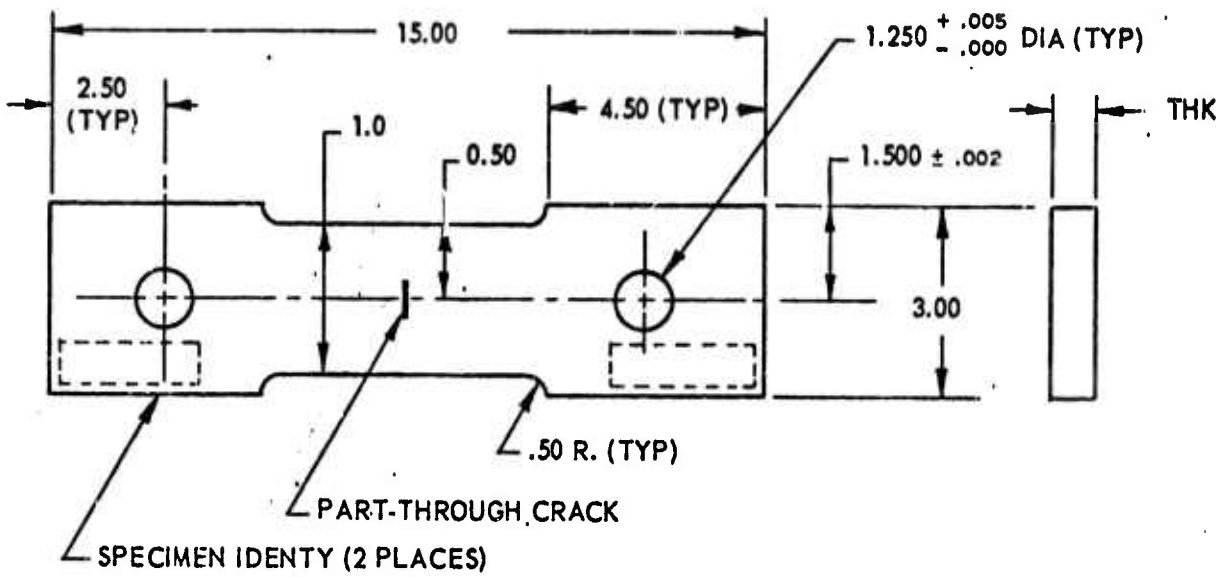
Typical Part-Through Crack Tensile Specimen for Structural Metals
